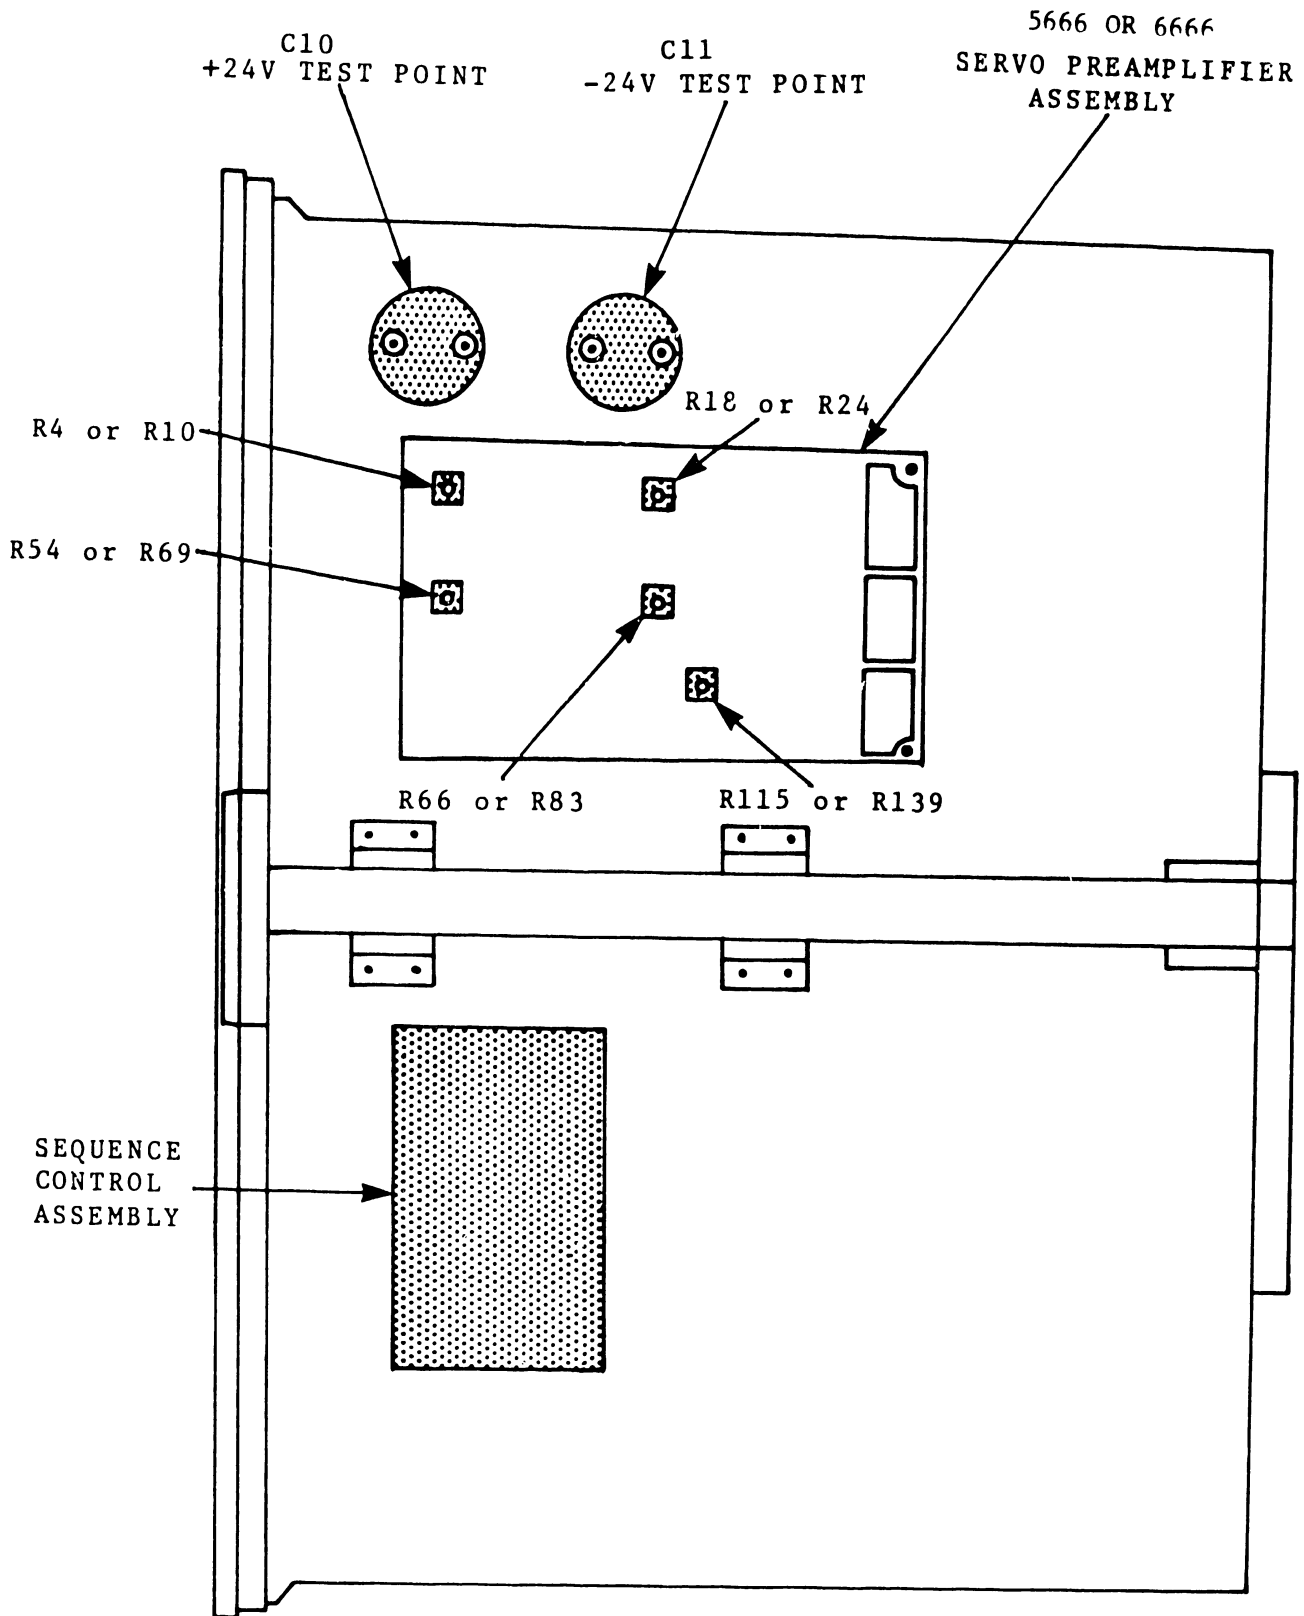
RIGHT SIDE VIEW OF TAPE CHASSIS
